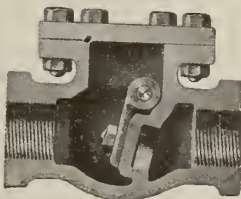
EXTRA HEAVY BRONZE HORIZONTAL SWING CHECK VALVE
